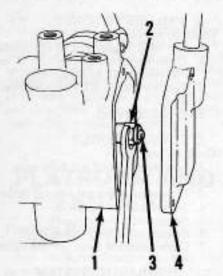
View showing location of locknut used to adjust connecting link on cab or platform equipped models.
